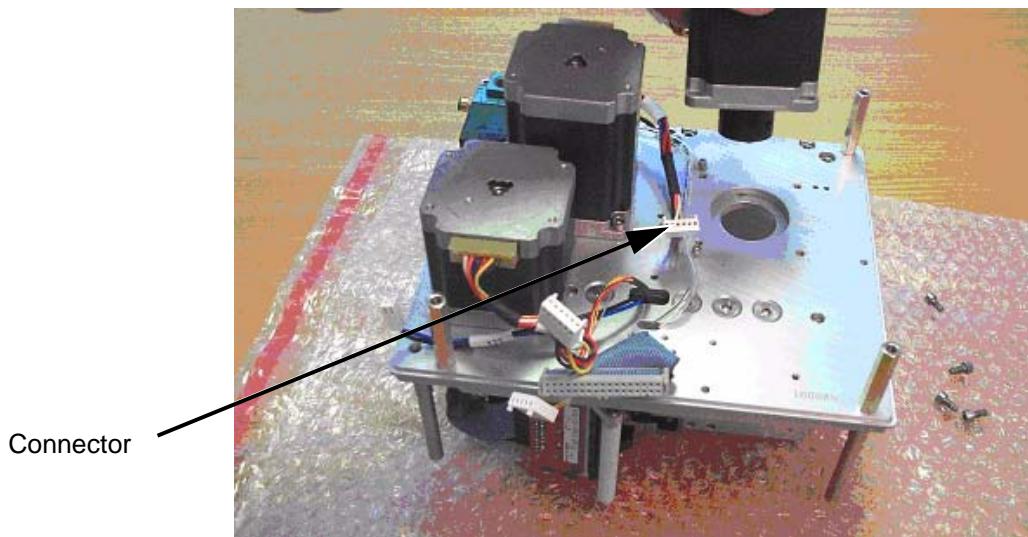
Ribbon Motor Drive Assembly- Removal
